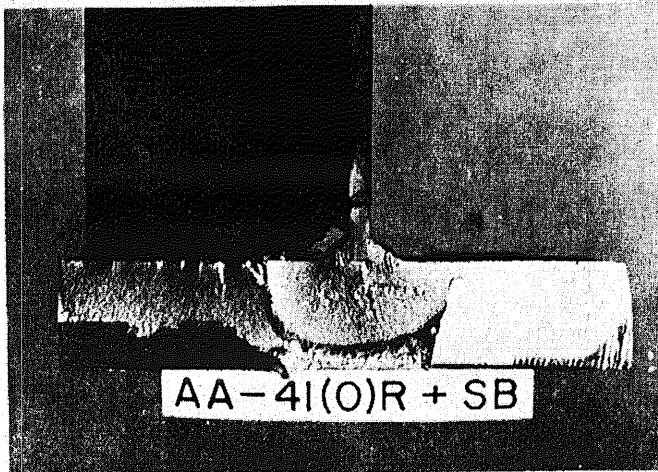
TYPICAL FATIGUE FRACTURES OF STIFFENER SPECIMENS
